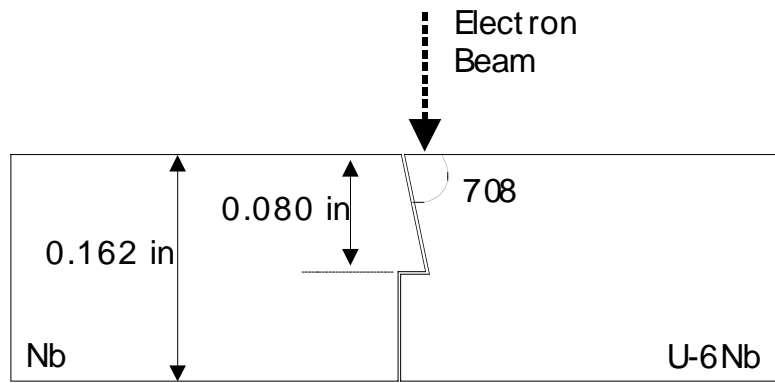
Schematic drawing of the electron beam weld joint design. The beam is offset 0.020 inch into the U-6%Nb alloy from joint interface on the top surface of the component.
